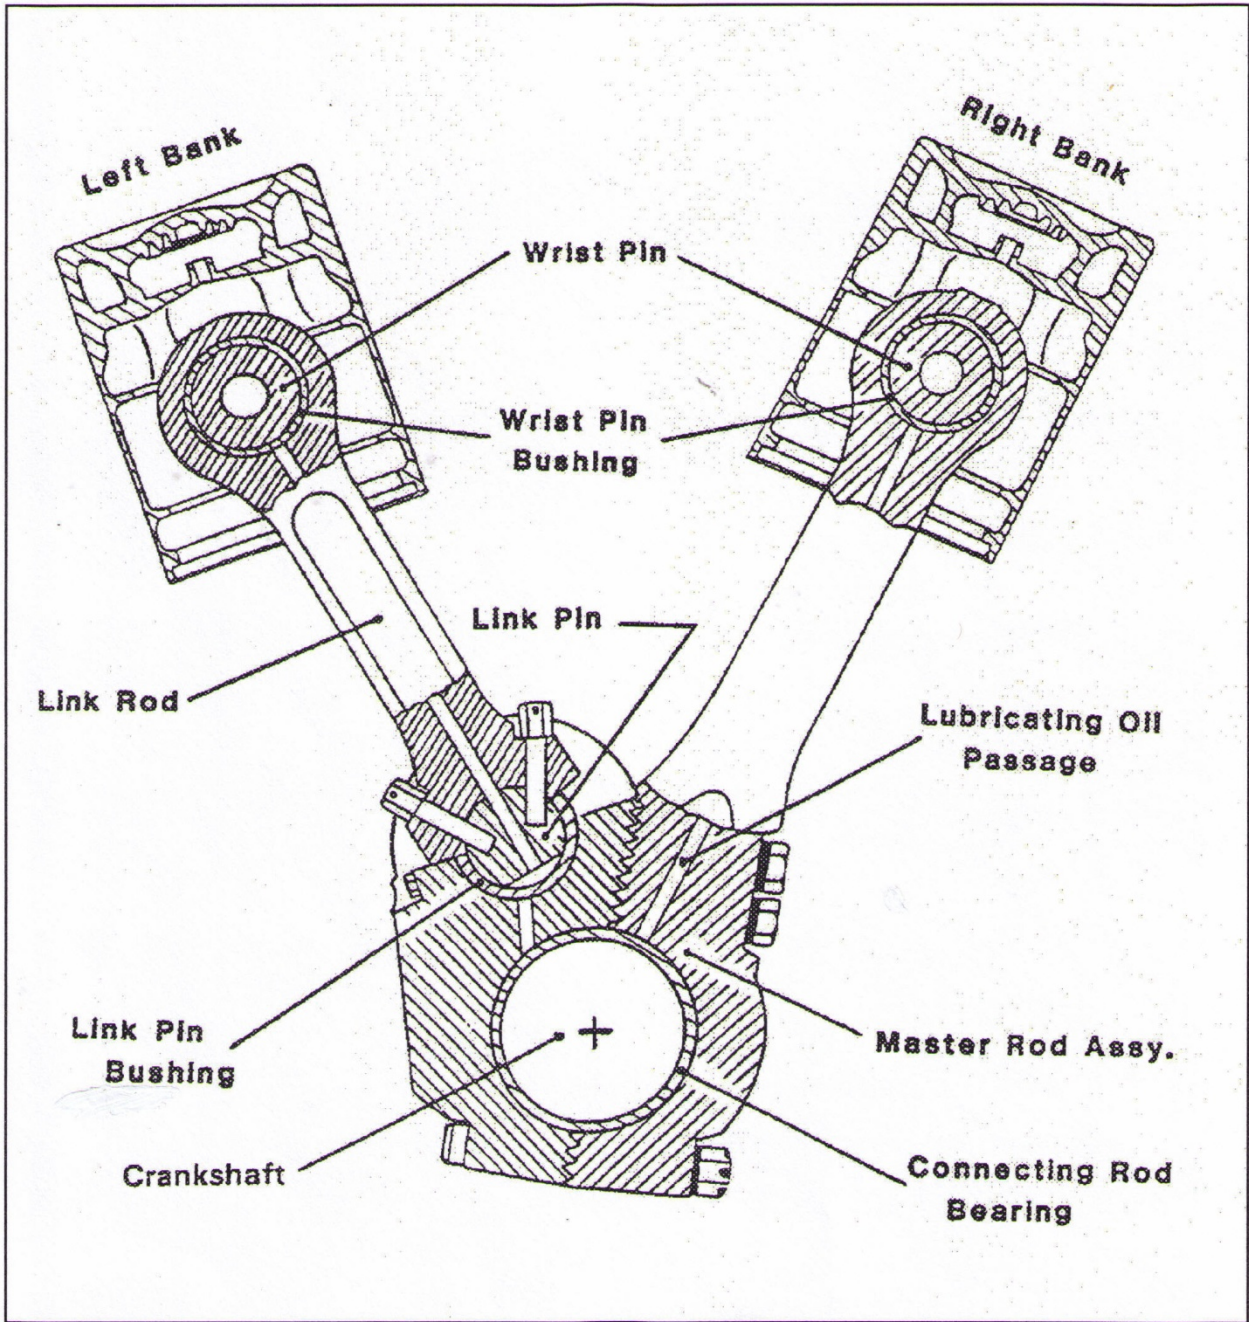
DeLaval Engine Articulating Connecting Rod Assembly
